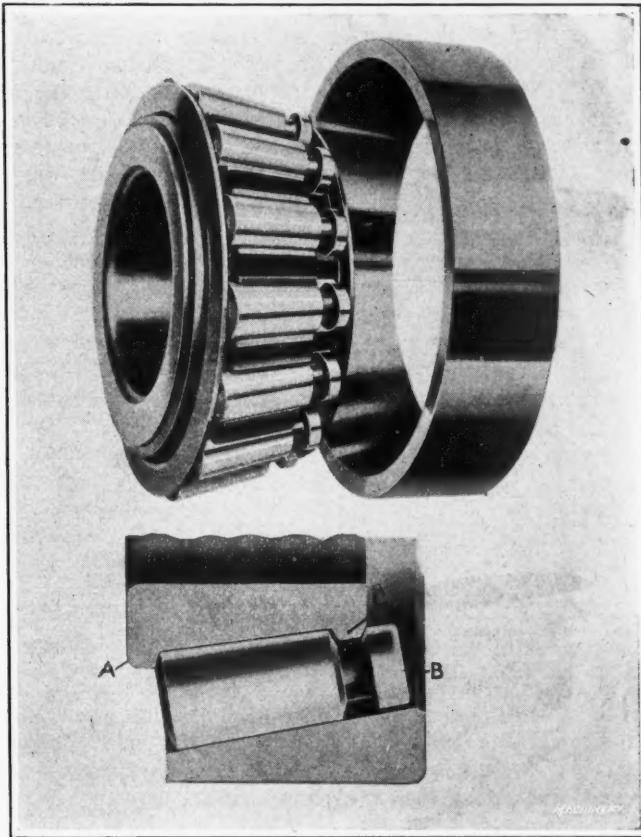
Roller Bearing in which Rollers are held in Retaining Cage
